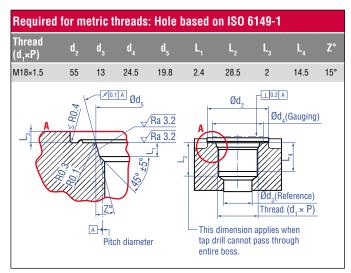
Notice for threaded flange M18×1.5-6g based on DIN ISO 6149-1
